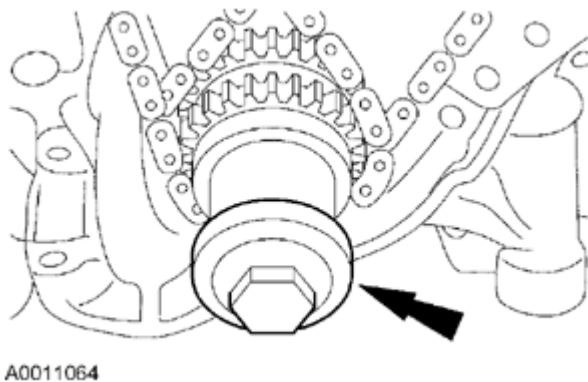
Locating Crankshaft Pulley Bolt And Washer
